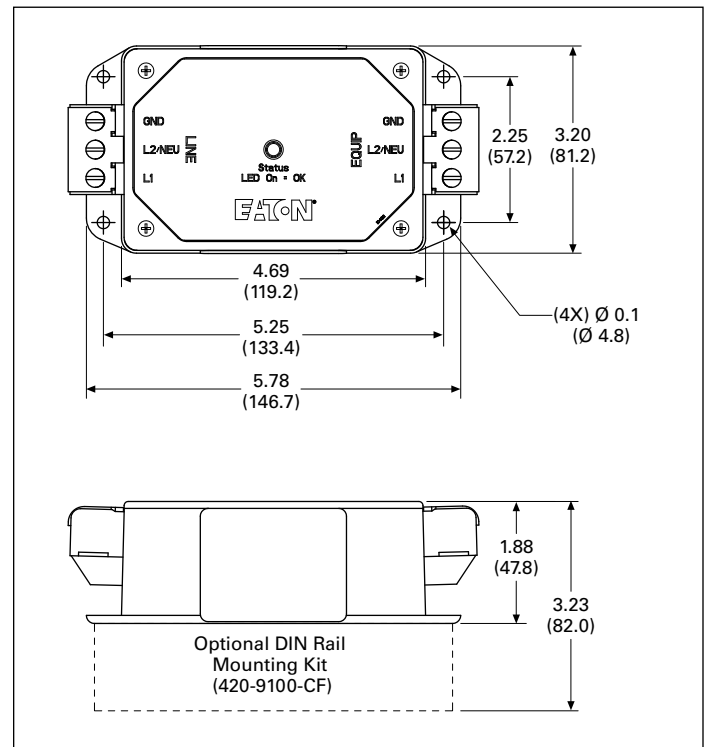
AGCNxxx30 Dimensions in Inches (mm)
